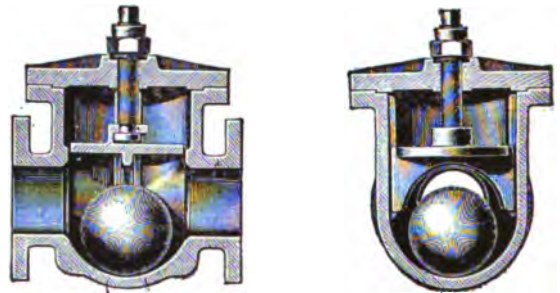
Automatic Closing Valve (System Schäffer and Budenburg), acts in both directions of flow of steam.
